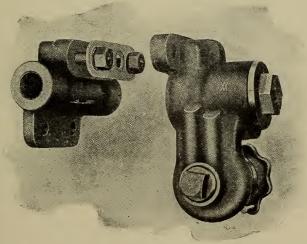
The B-6 Feed Valve—Valve Removed from Pipe Bracket.
